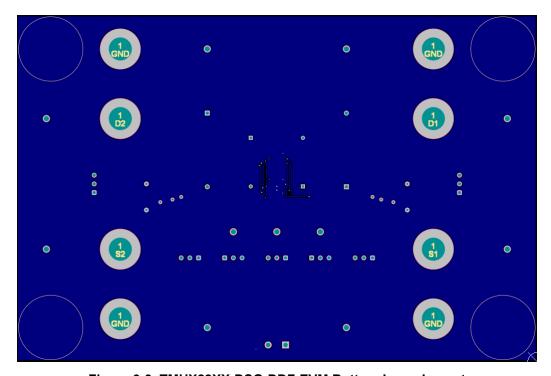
TMUX28XX-DSG-DDF-EVM Bottom Layer Layout
